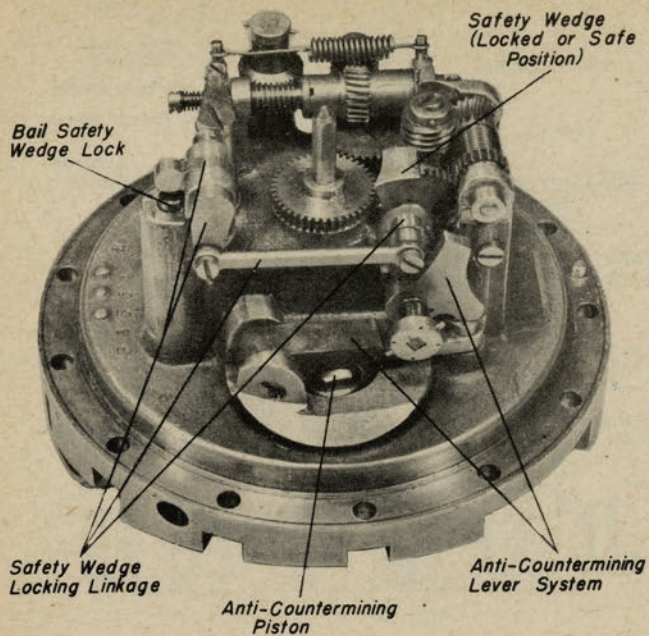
Exploder Type 2 Arming Assembly, Left Side
